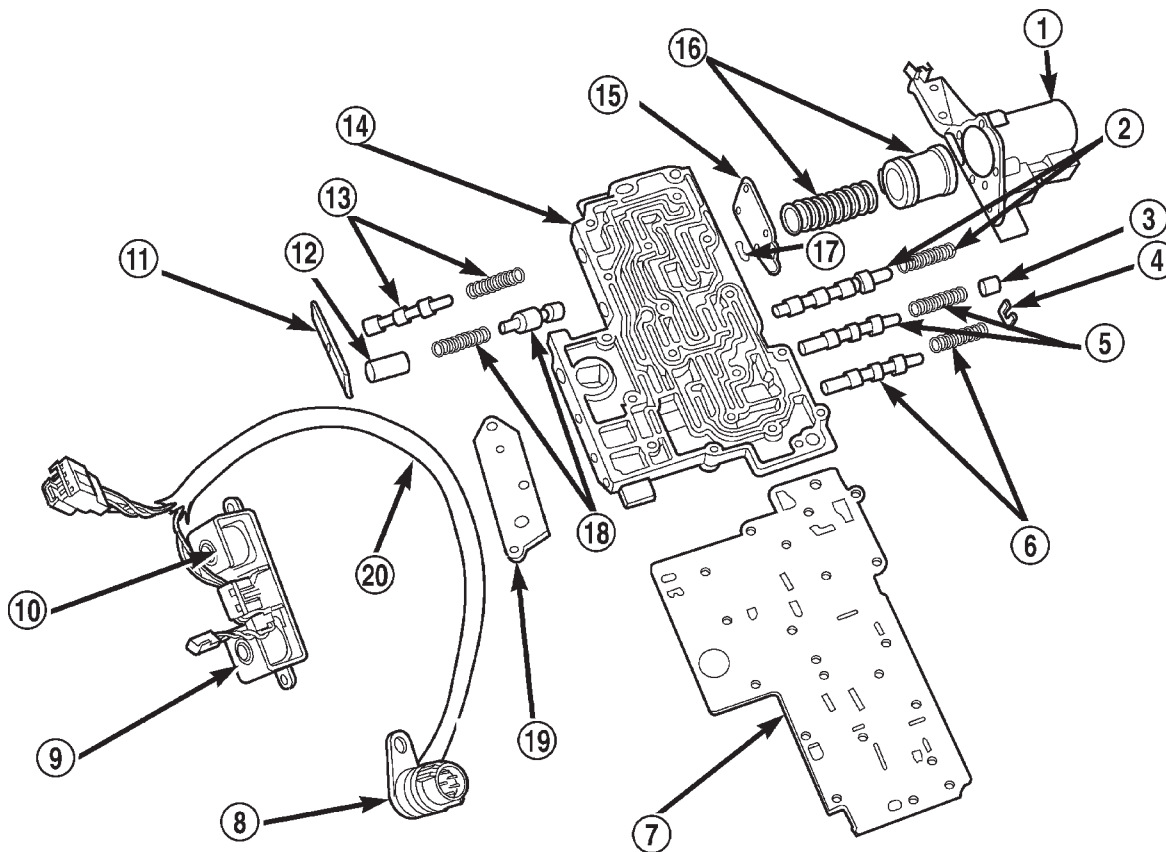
Upper Housing Shift Valve And Pressure Plug Locations
